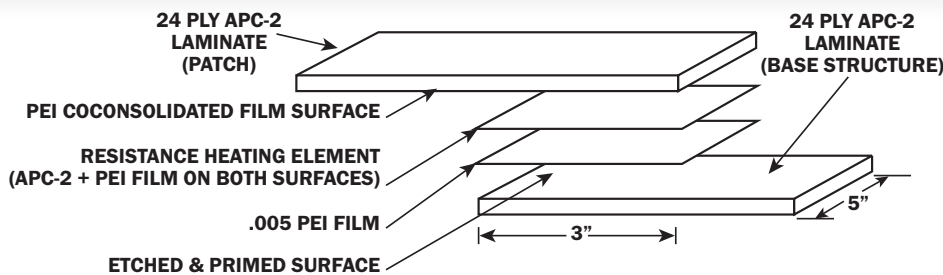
Configuration for Amorphous Thermoplastic Bonding via Resistance Welding [18].
